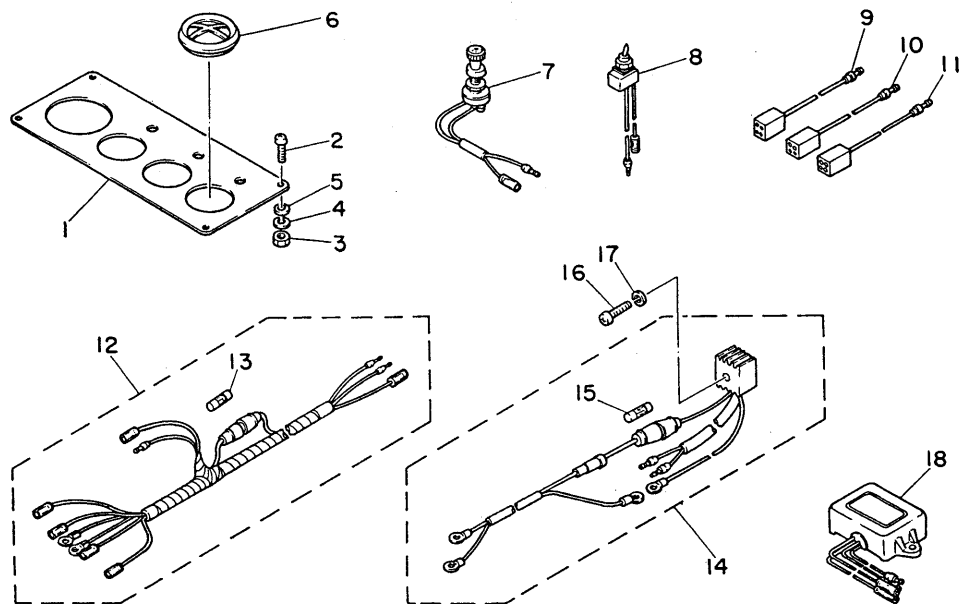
ACCESSORY PARTS 3 -'80/'81
